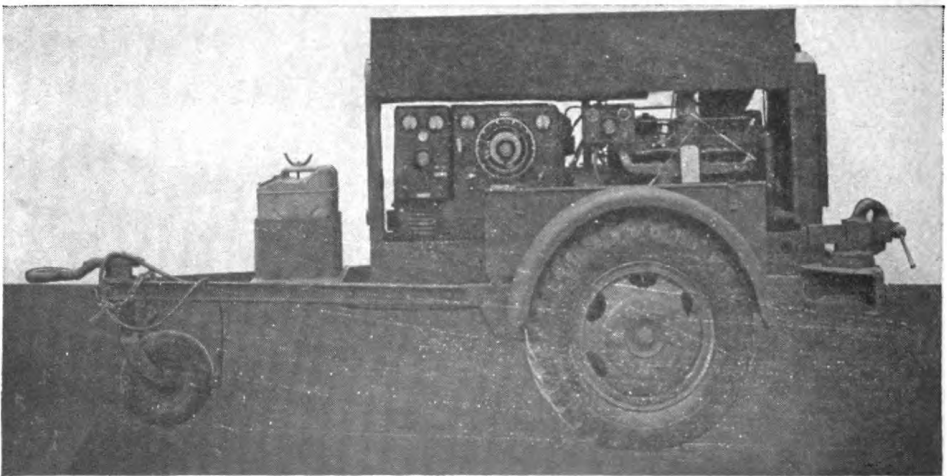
Welding equipment: set No. 1, electric-arc, gasoline-engine-driven, 300-ampere, trailer-mounted.
